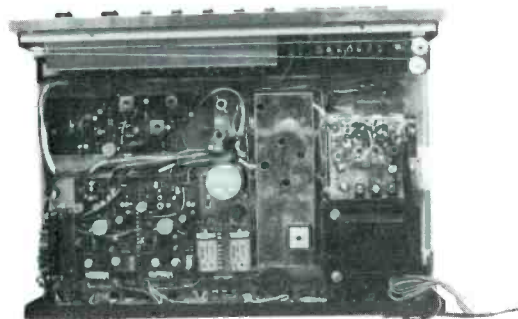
Internal view of chassis, showing modular printed-circuit construction and sealed front-end and i.f. sections.
